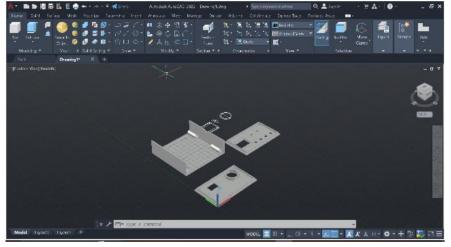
3D View of box; (a) front (b) back (c) middle
